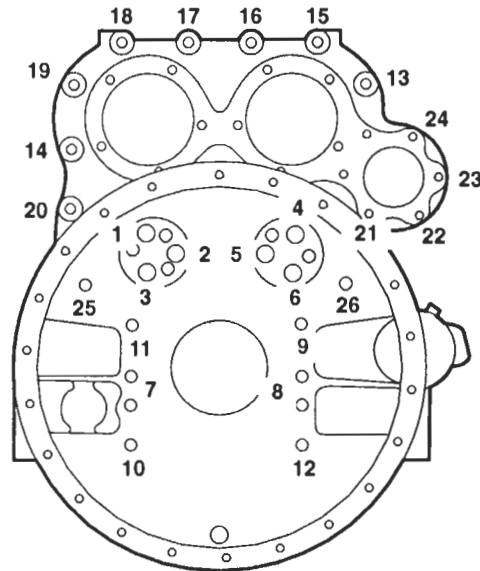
Flywheel Housing Bolt Tightening Sequence (Operation 1)
